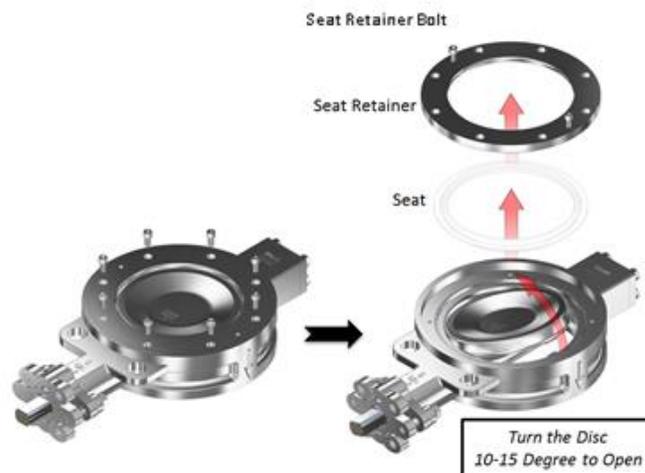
SOFT SEATED DISASSEMBLY DIAGRAM
